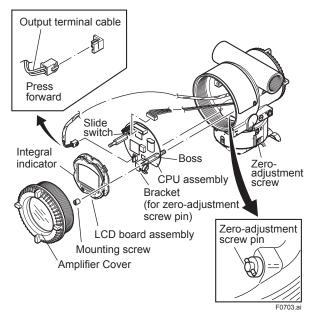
Removing and Attaching LCD Board Assembly and CPU Assembly
